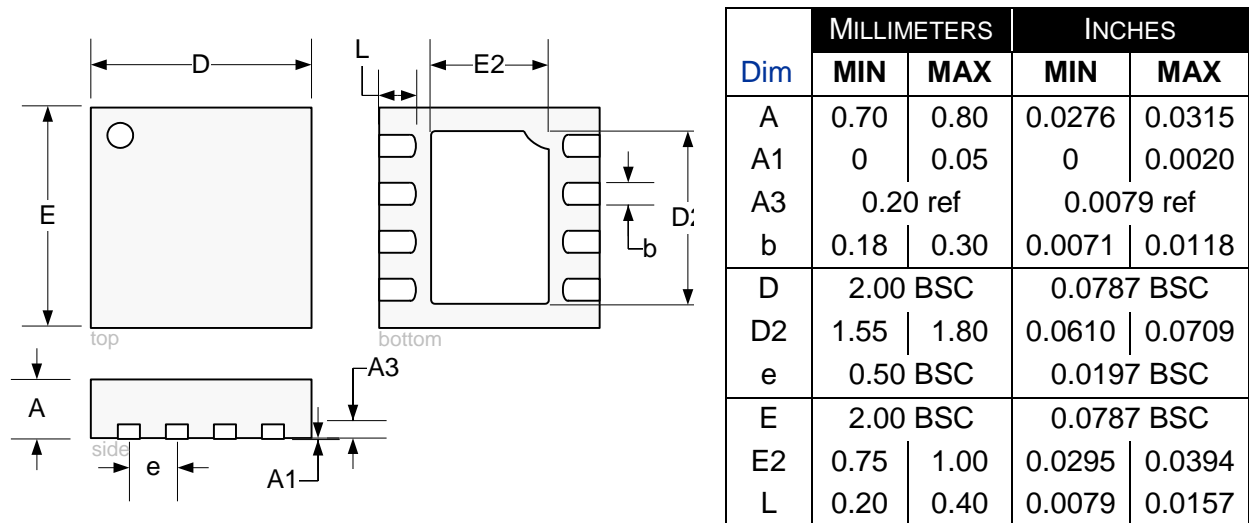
8 Pin Plastic DFN 2x2mm Dual Exposed Pad Package Dimensions
